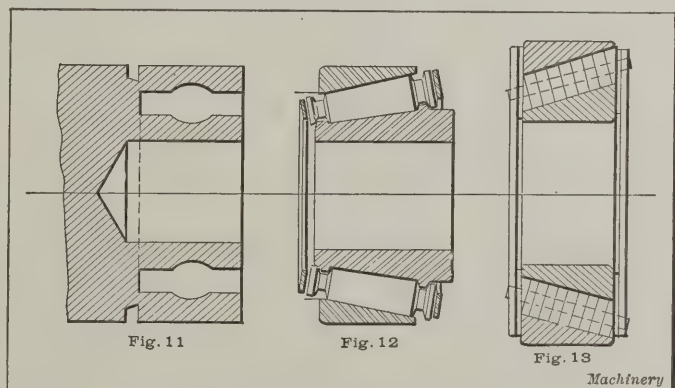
Method of Turning Ball Races from Bar Stock. Figs. 12 and 13. Taper Roller Journal and Thrust Bearings
